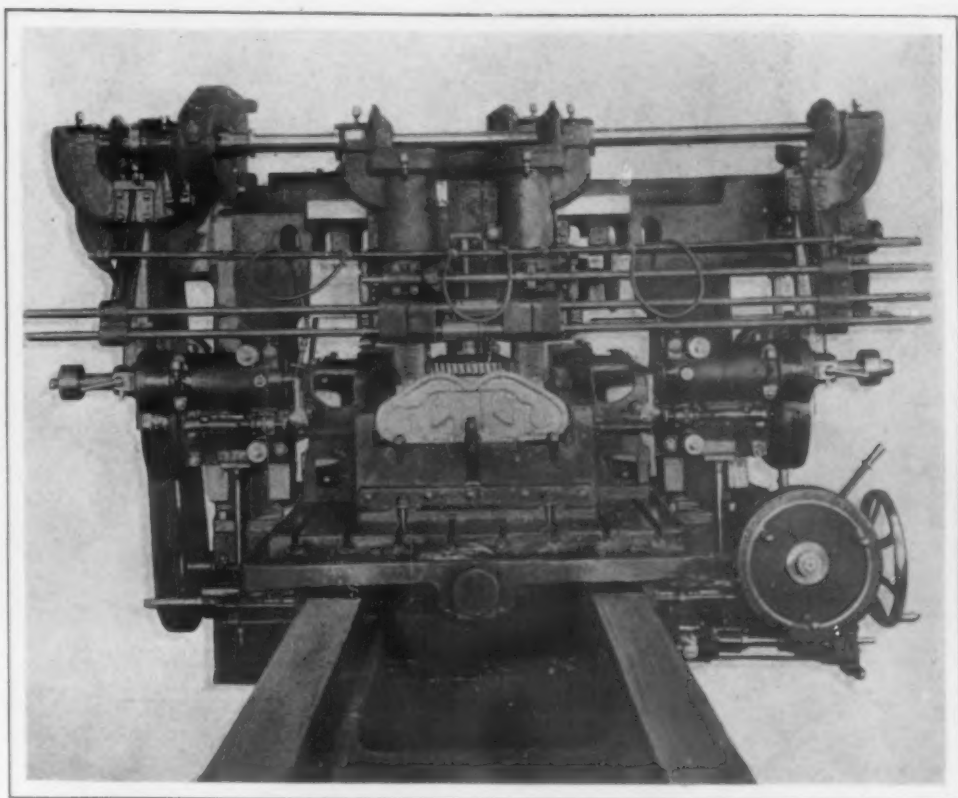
Another Milling Machine Set Up in Which Three Crank Cases Are Machined Simultaneously on One Vertical and Two Horizontal Spindles
